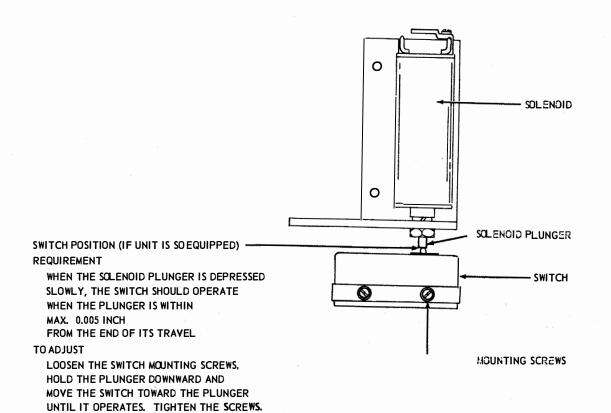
ELECTRICAL SERVICE UNIT, MOTOR CONTROL RELAY
